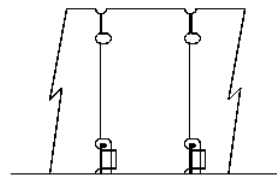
Block assembly method 4-1a and 4-1b [2], [30]
